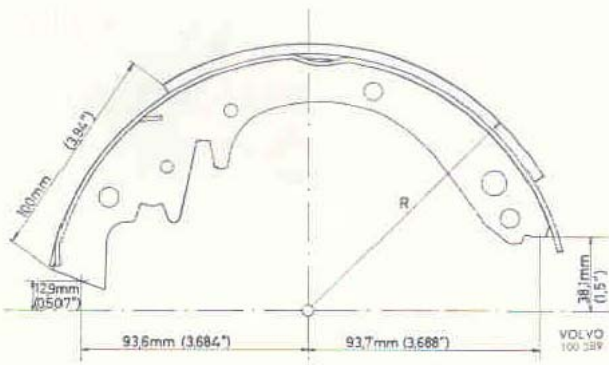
Adjusting measurements for rear wheel front brake shoes.
